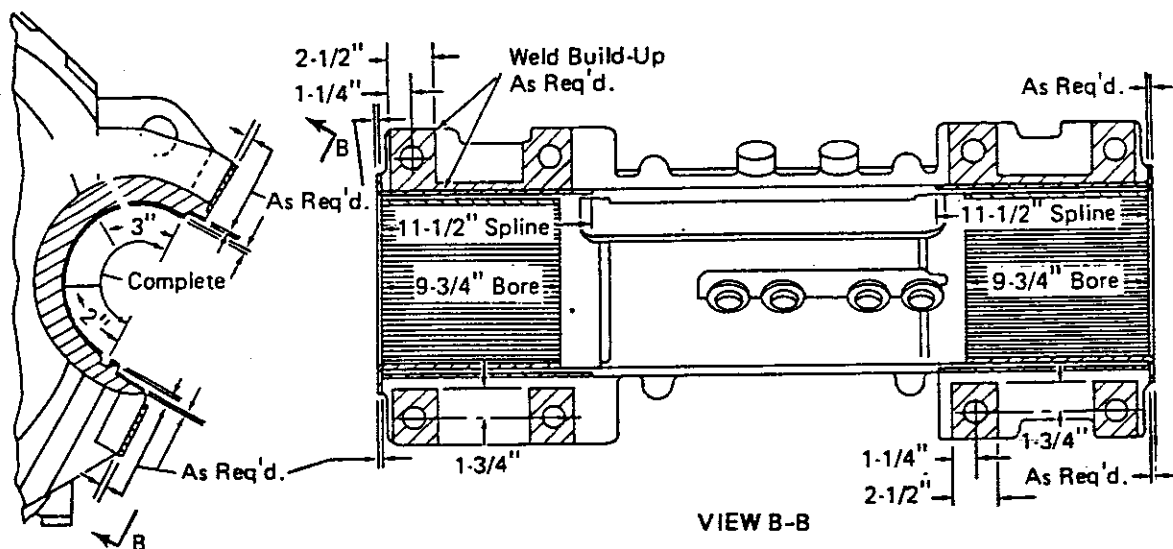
Frame Axle Bore Rebuild Welding
